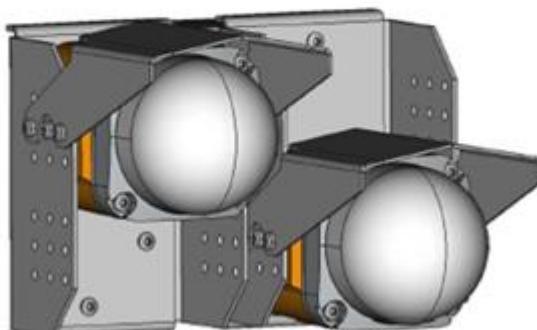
Two LPR®-1DHP-200 mounted in the diversity mounting bracket.
